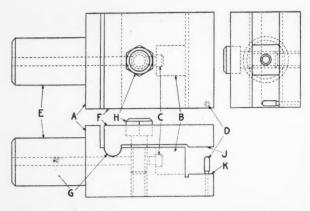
Design of Fixture Used to Hold Tee for Machining in a Turret Lathe
